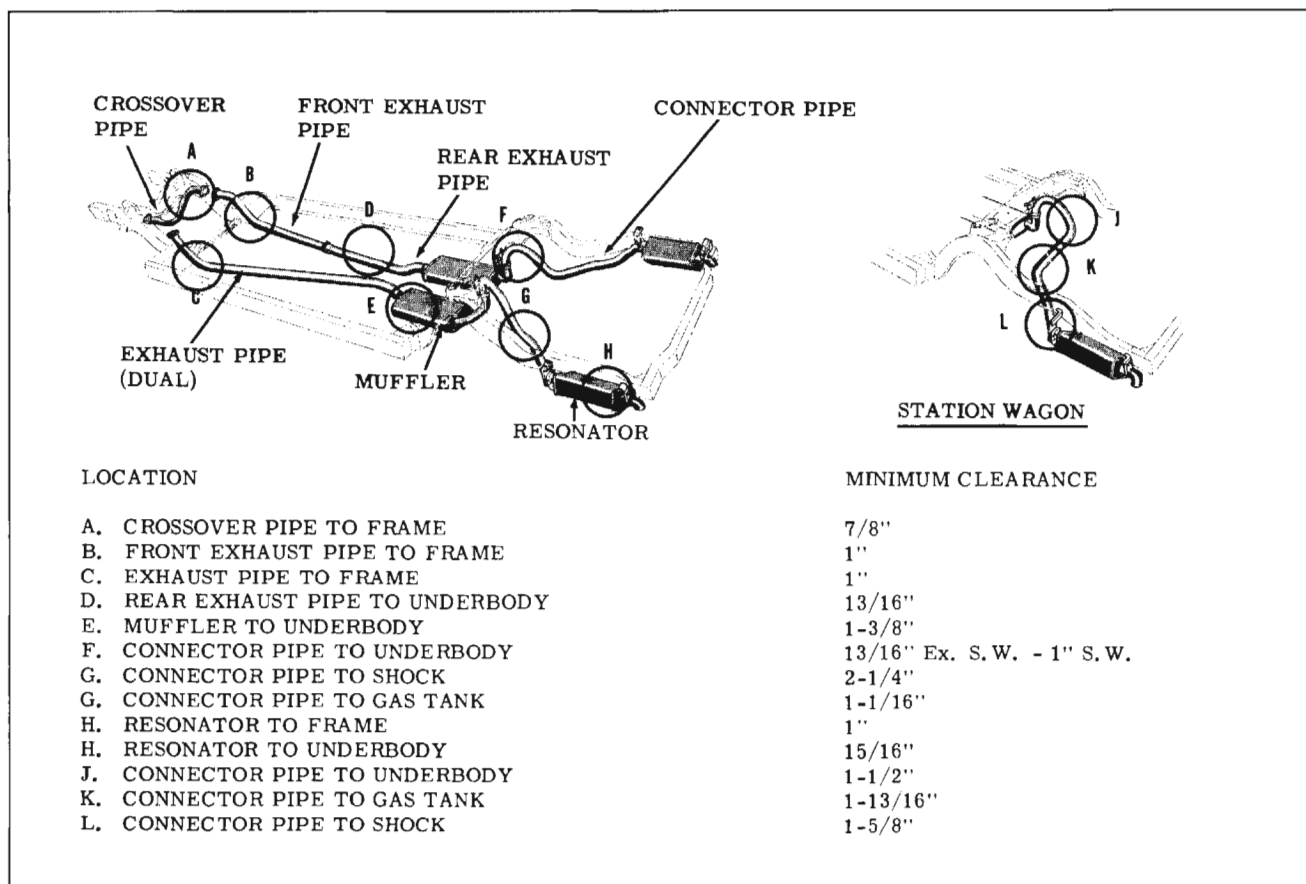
Clearance Specifications for Exhaust System Parts
